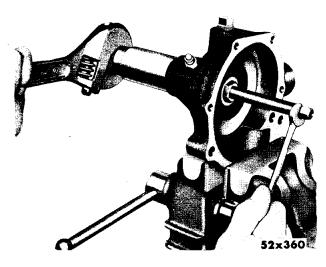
Removing Water Pump Shaft Bushings, Tool C-373 (B-4-B, B-4-C, B-4-D, B-4-PW, B-4-DU and B-4-EU)
